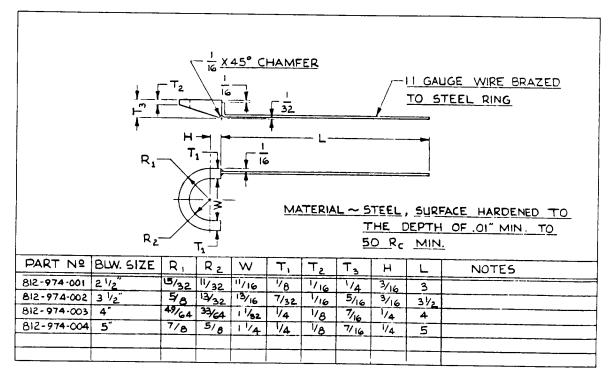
Thrust Adjuster Saddle page - 3 - 814
